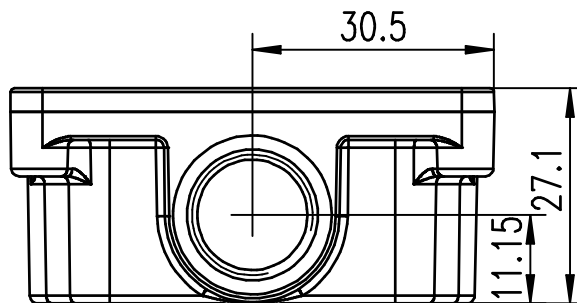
ETKS_C3 Side View with PG9 thread
